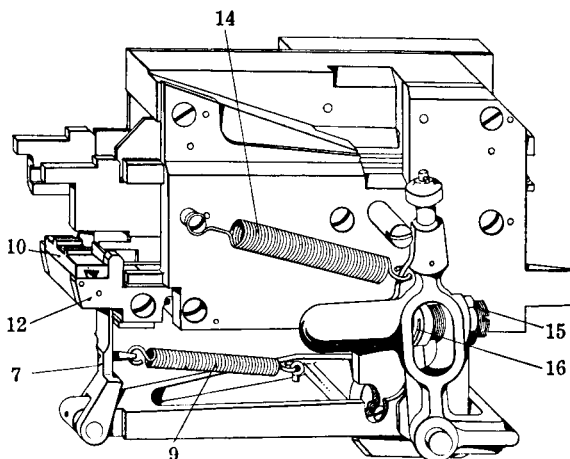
Back view of the distributor box, upper, on Models 25 and 26 Linotype. This distributor box is similar to the box used on the single distributor machines except that it is equipped with the bridge support 12 which bears the matrix bridge 10.
